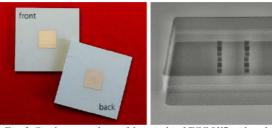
Single pre-packages fabricated in LTCC 9K7 with embedded SiC dummy chips having 5mm edge length (component left, X-Ray image right)
